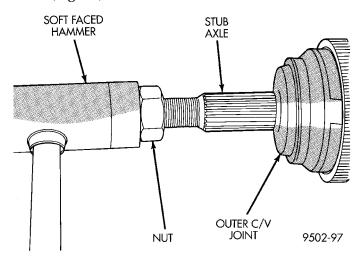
Outer C/V Joint Installation on Interconnecting Shaft
